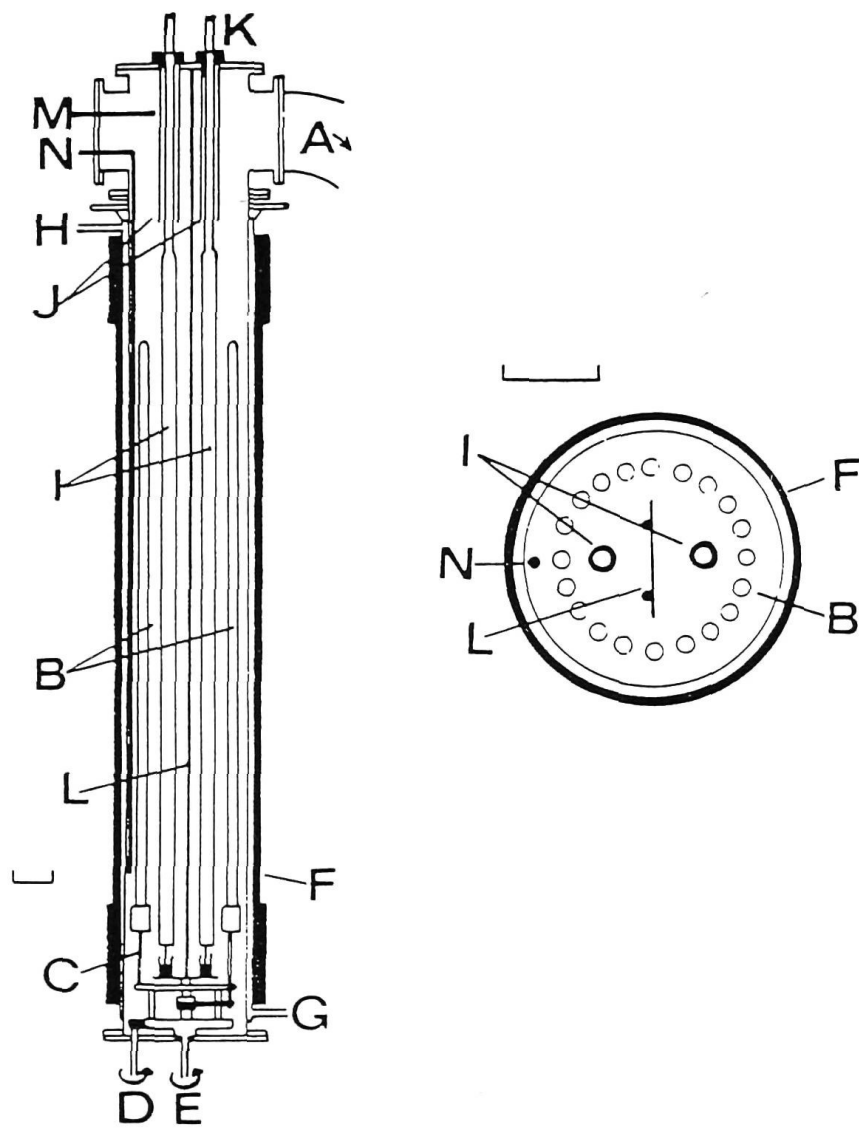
Sectional views of the batch coater. A: to pumps; B: glass tubes; C: carousel; D: carousel rotation drive; E: tube rotation drive; F: magnetic field coil; G: water jacket inlet; H: water jacket outlet; I: sputtering electrodes; J: guard rings; K: high voltage connections and water cooling for electrodes; L: water cooled screen; M: argon inlet; and N: reactive gas inlet. The scale indicates 100mm. [reprinted from ref. 13]
